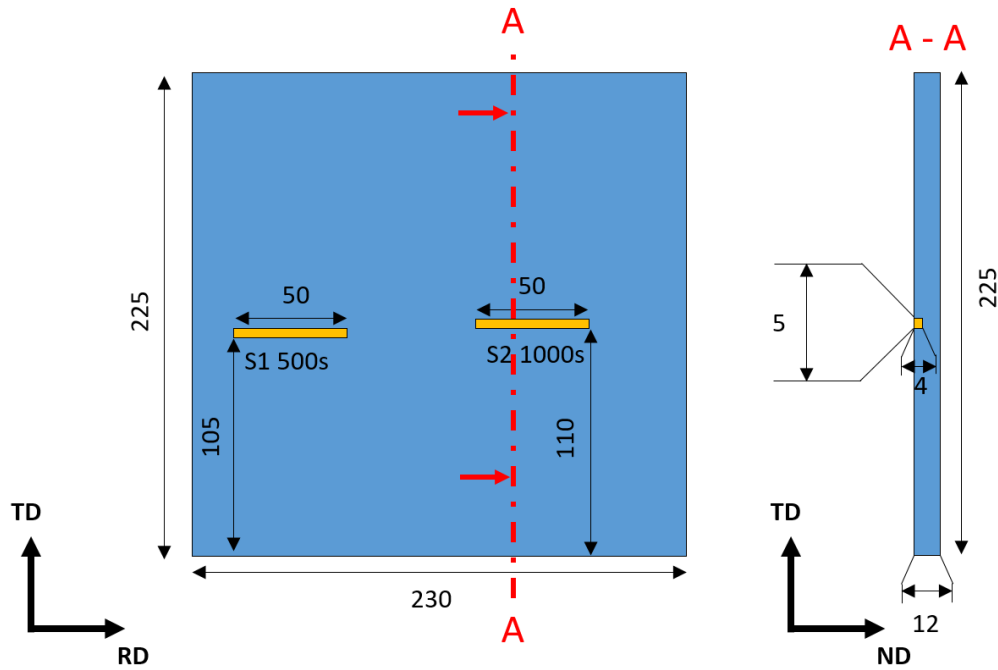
The sample are rods (in orange) extracted from a hot rolled tungsten plate (in blue). The rod sample dimensions are $5 \times 4 \times 50$ mm. The rod was extracted from the skin to $1/3$ of the thickness of the plate. Dimensions are indicated in mm. RD corresponds to the first rolling axis, TD corresponds to the second rolling axis and ND corresponds to the axis normal to the rolling directions.
